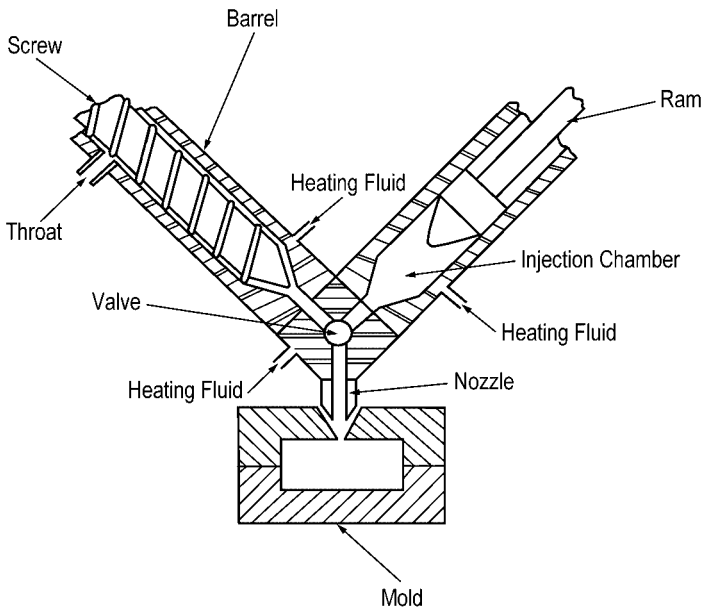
Injection molding machine with separate ram and screw (courtesy of J. Sommer and Rubber Division ACS [4])
